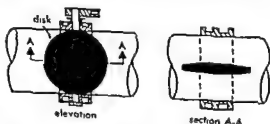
Butterfly-type valve for penstock is typically 25 ft in diameter
